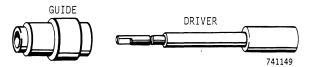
D62915 Tool Kit for Valve Guide Removal and Installation
